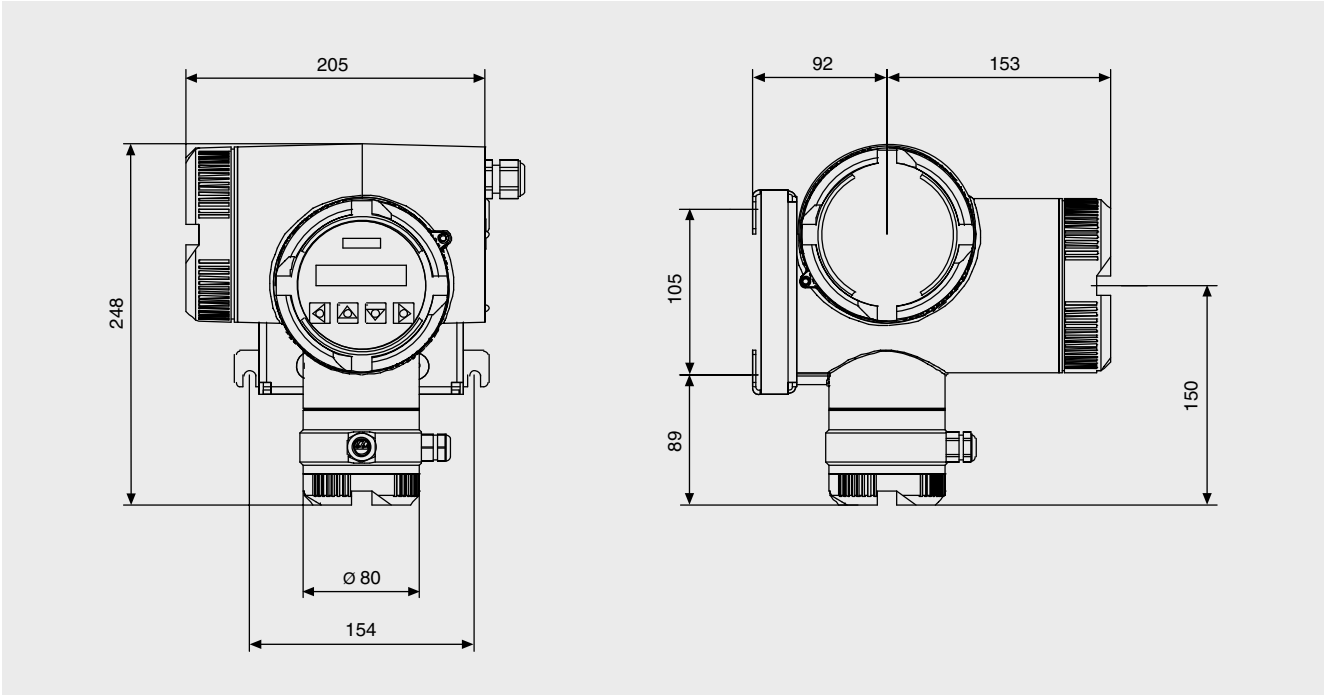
/28 SITRANS F M transmitter Intermag 2 with optional mounting plate also for pipeline mounting, dimensions in mm
